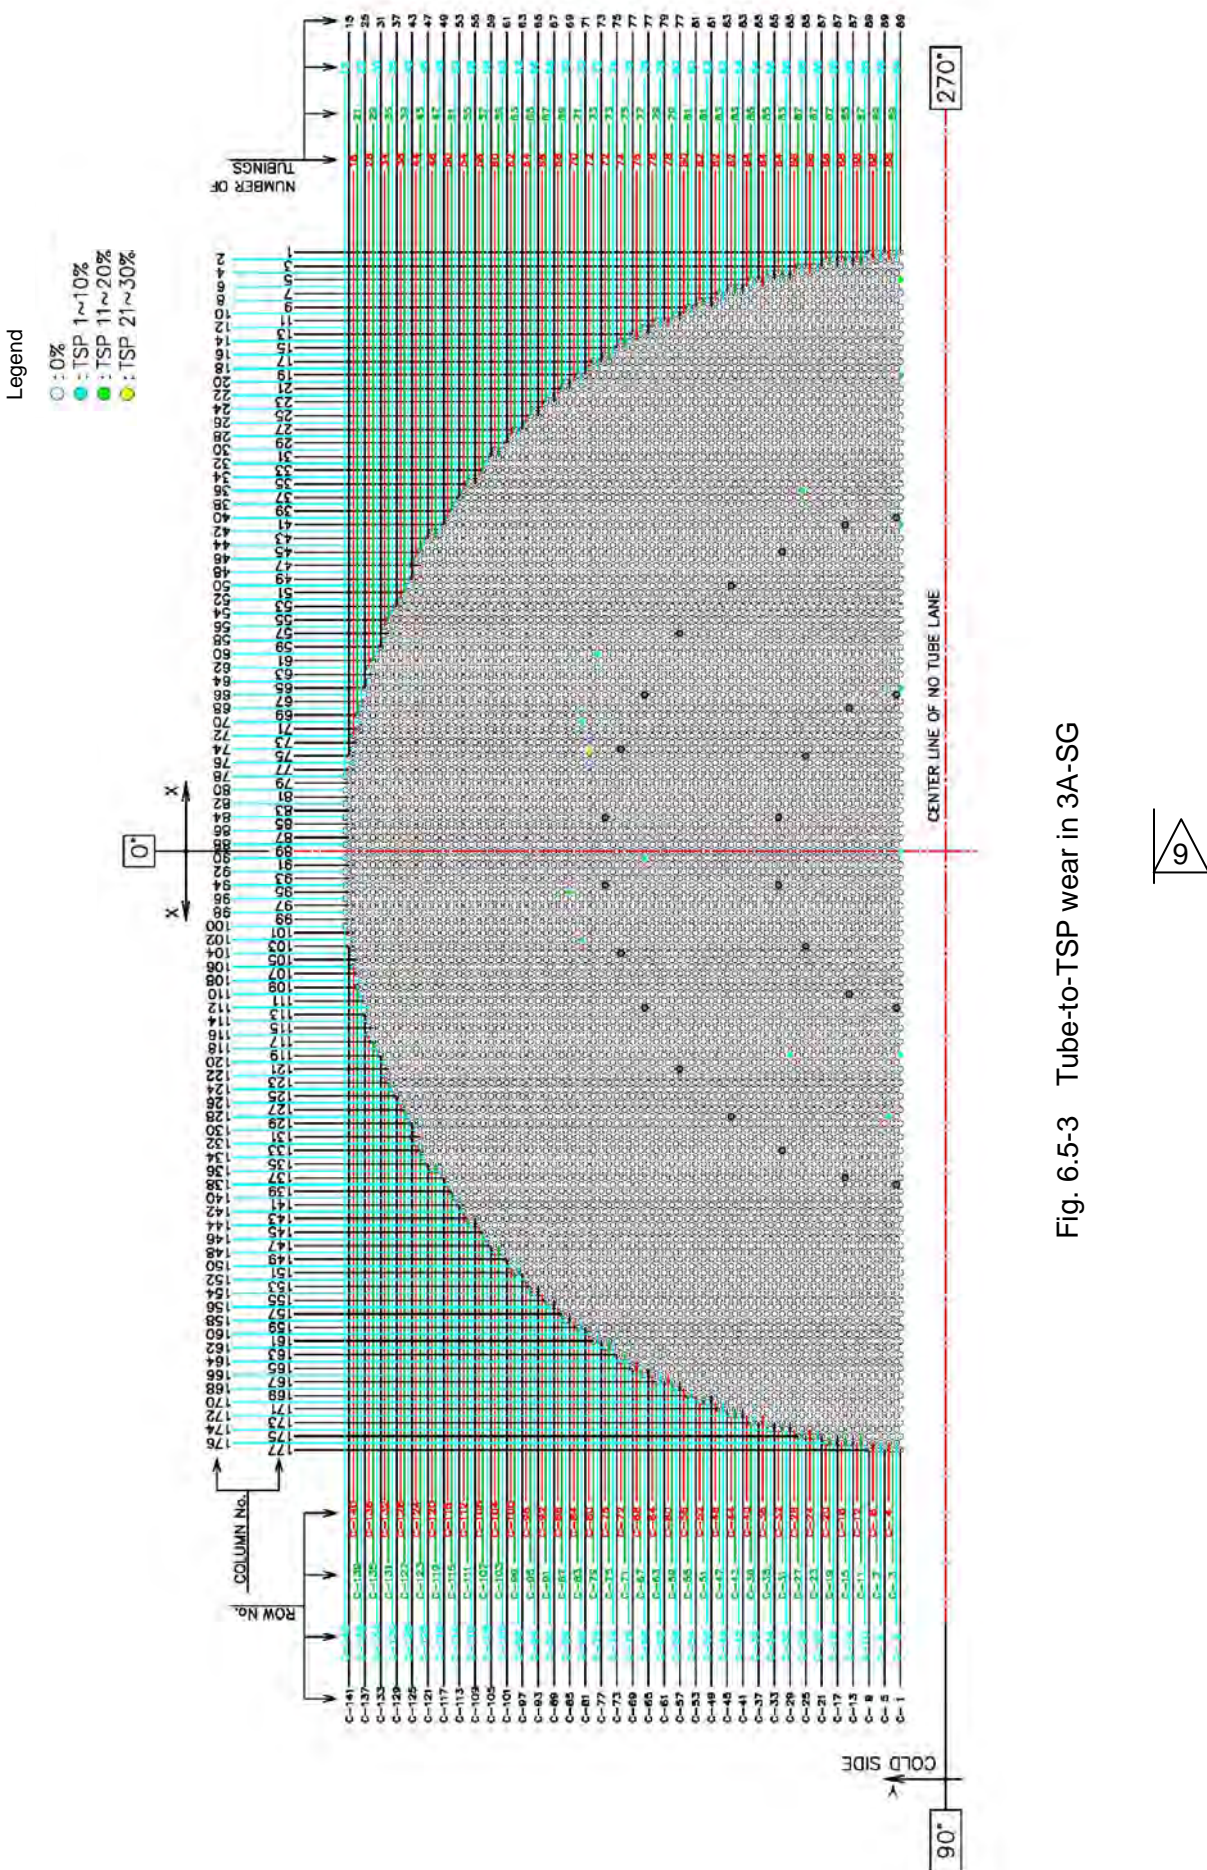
Tube-to-TSP wear in 3A-SG
